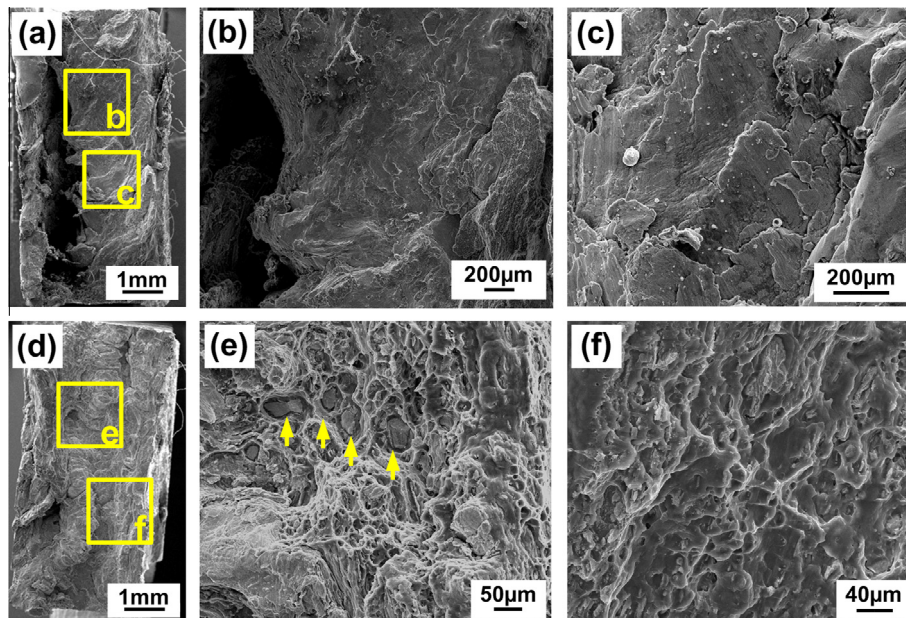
Fracture surface morphologies of joints produced at 40 mm/min (a–c) and 20 mm/min (d–f): (a and d) overview of fracture surface; (b, c) high magnification of regions b and c marked in (a); (e, f) high magnification of regions e and f marked in (d).
